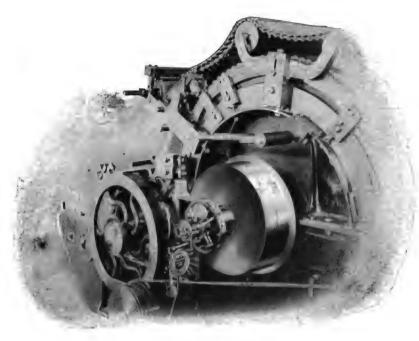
DYNAMOMETER APPLIED TO CARDING MACHINE.
